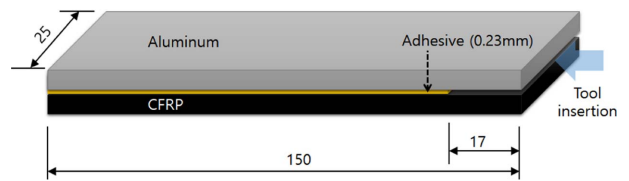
Cleavage peel test specimen for separation tests of adhesive joints
